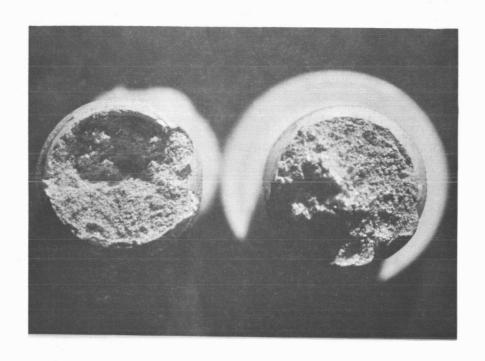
FRACTURE SURFACES, SPECIMEN 1, 8X
